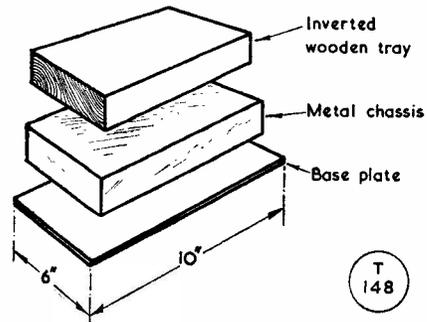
Mechanical assembly of the portable transmitter/receiver described by G8PG. The metal chassis is fixed to a base plate and the upper part of the chassis is enclosed by a wooden cover. When fitted together, the whole thing can be carried comfortably under one arm.
